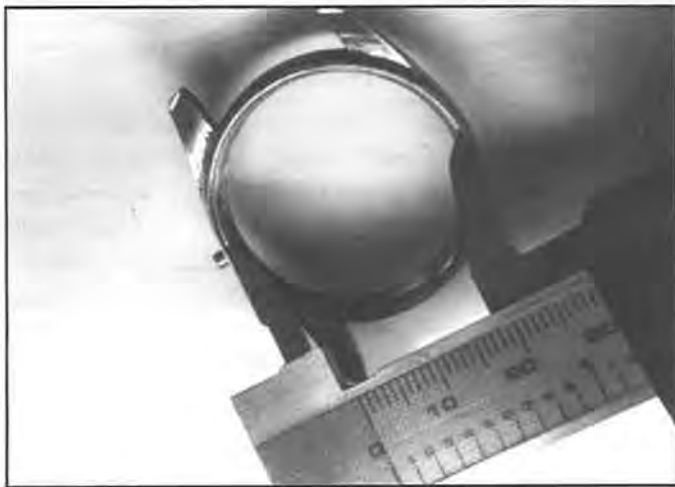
Measuring the outside of the case gasket seat which is 30.0 millimeters in this case.
